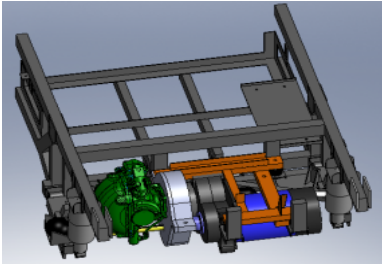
Pump/Motor Horizontally Mounted to Frame
